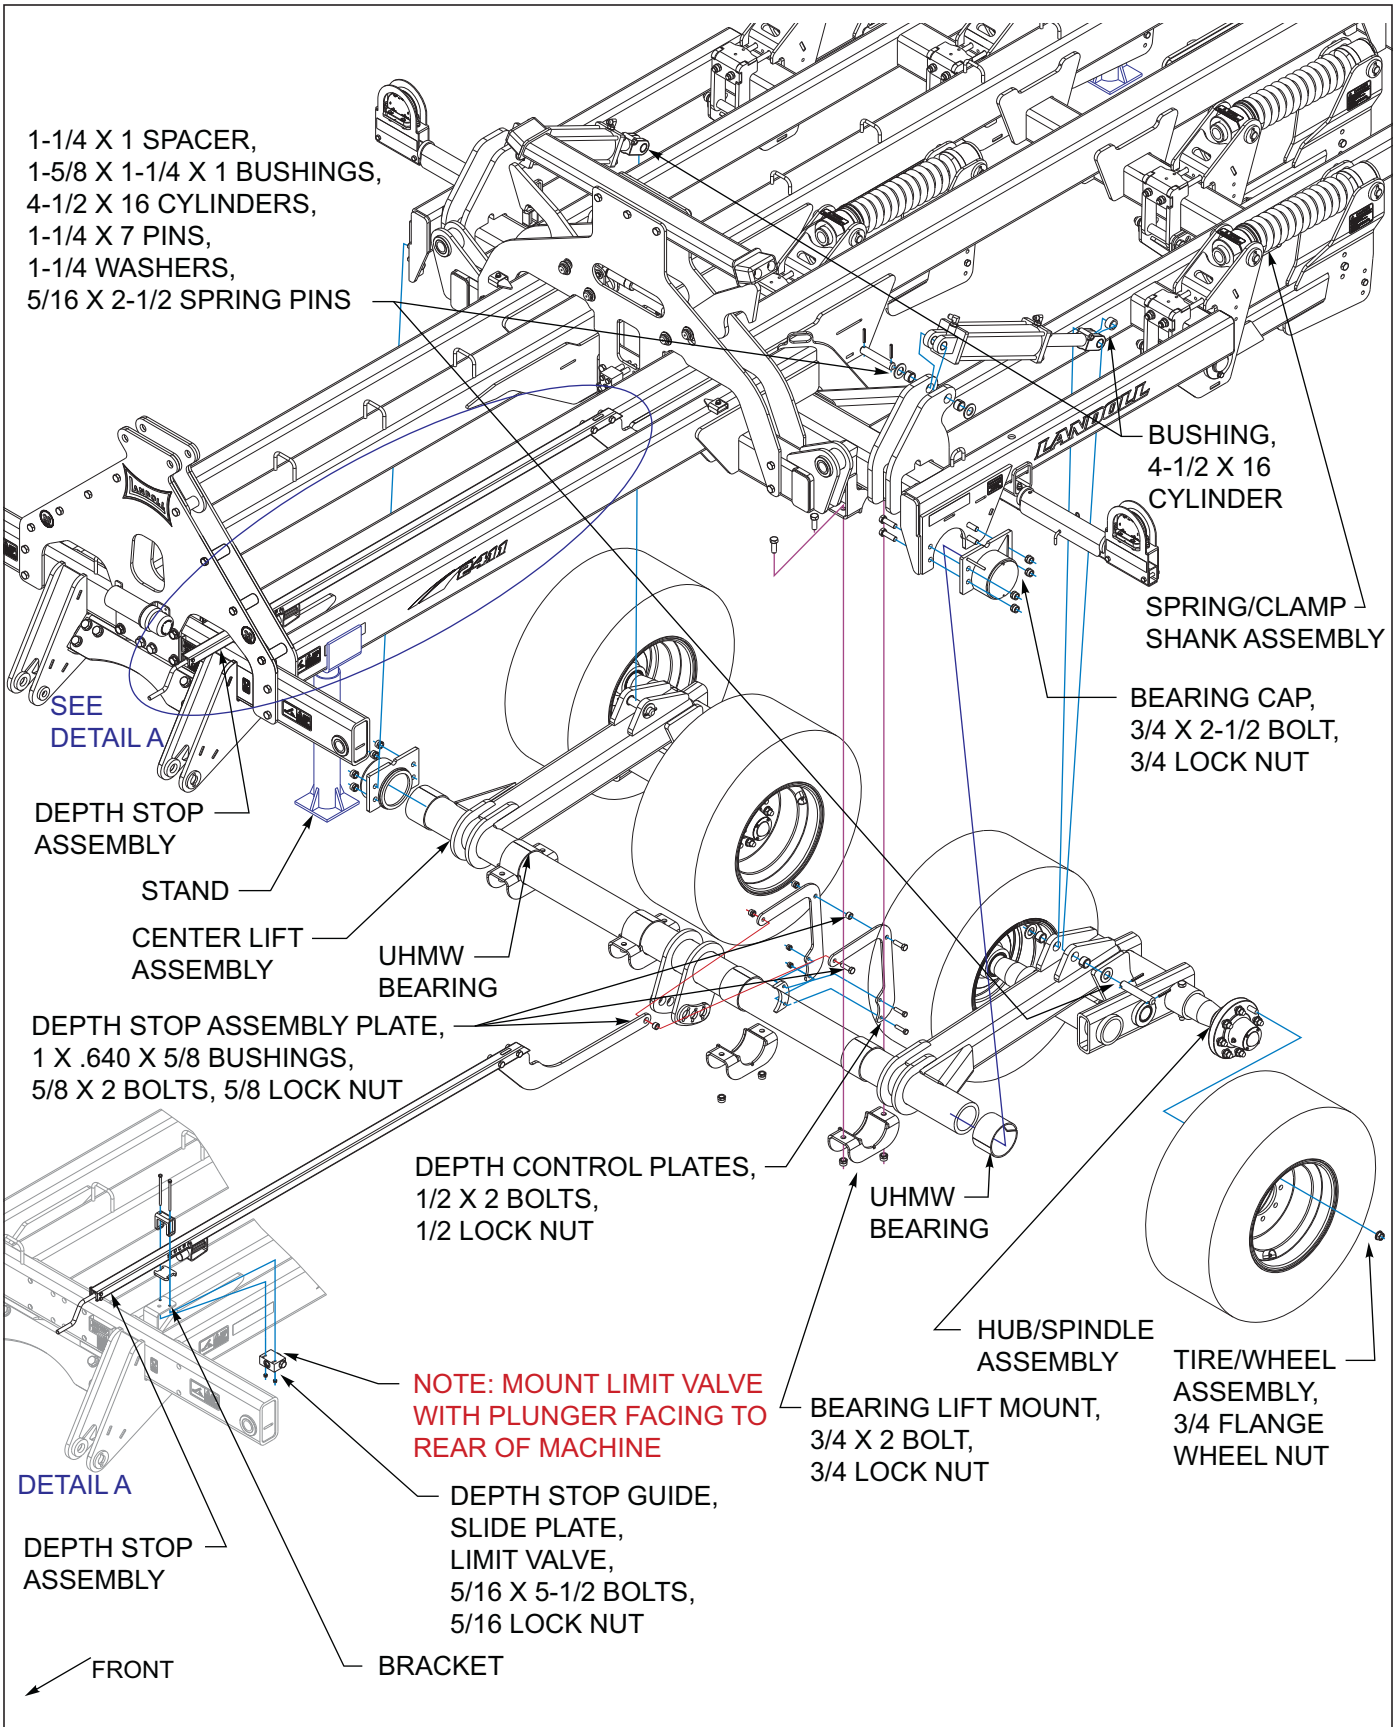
Center Frame Lift Assembly 2411AFG-07-09 After 08/01/2022
